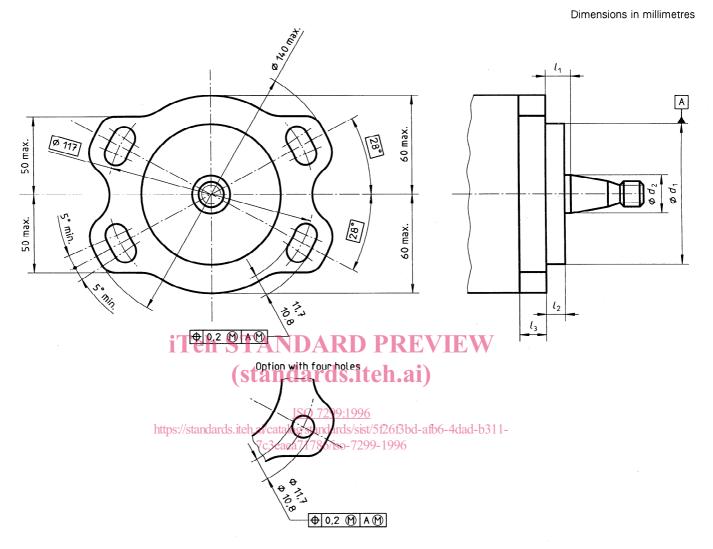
Rotary and distributor fuel injection pumps — Type 9 end-mounting flange
